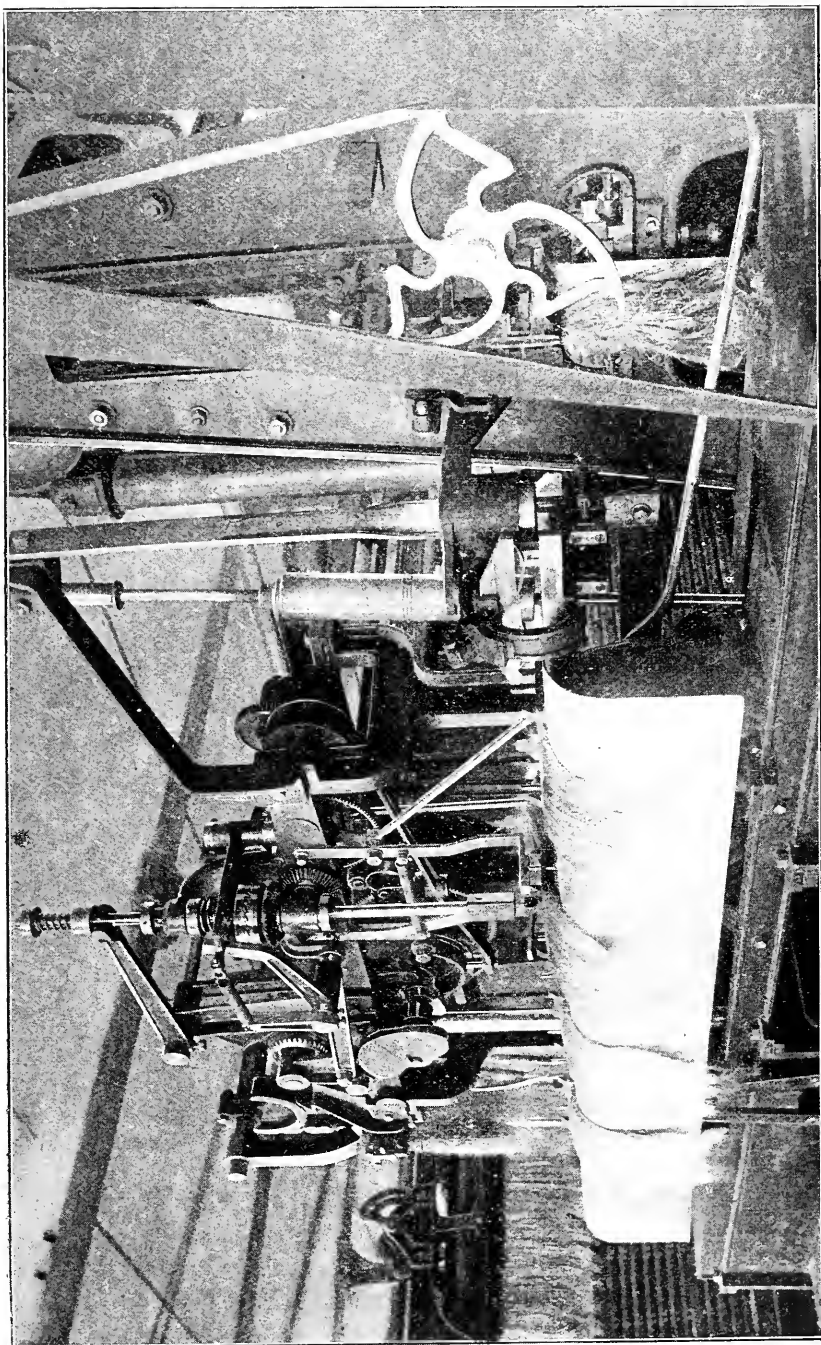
Reade, Crawford, & M'Kibbin's patent automatic screwing for hackling machines. (Changing end.)
